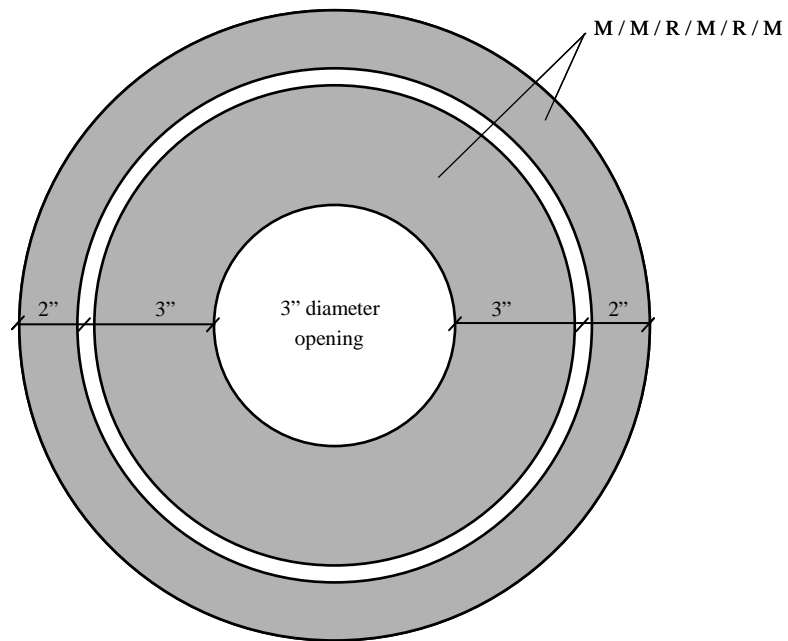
Exterior reinforcement of 4" gusseted nozzle
